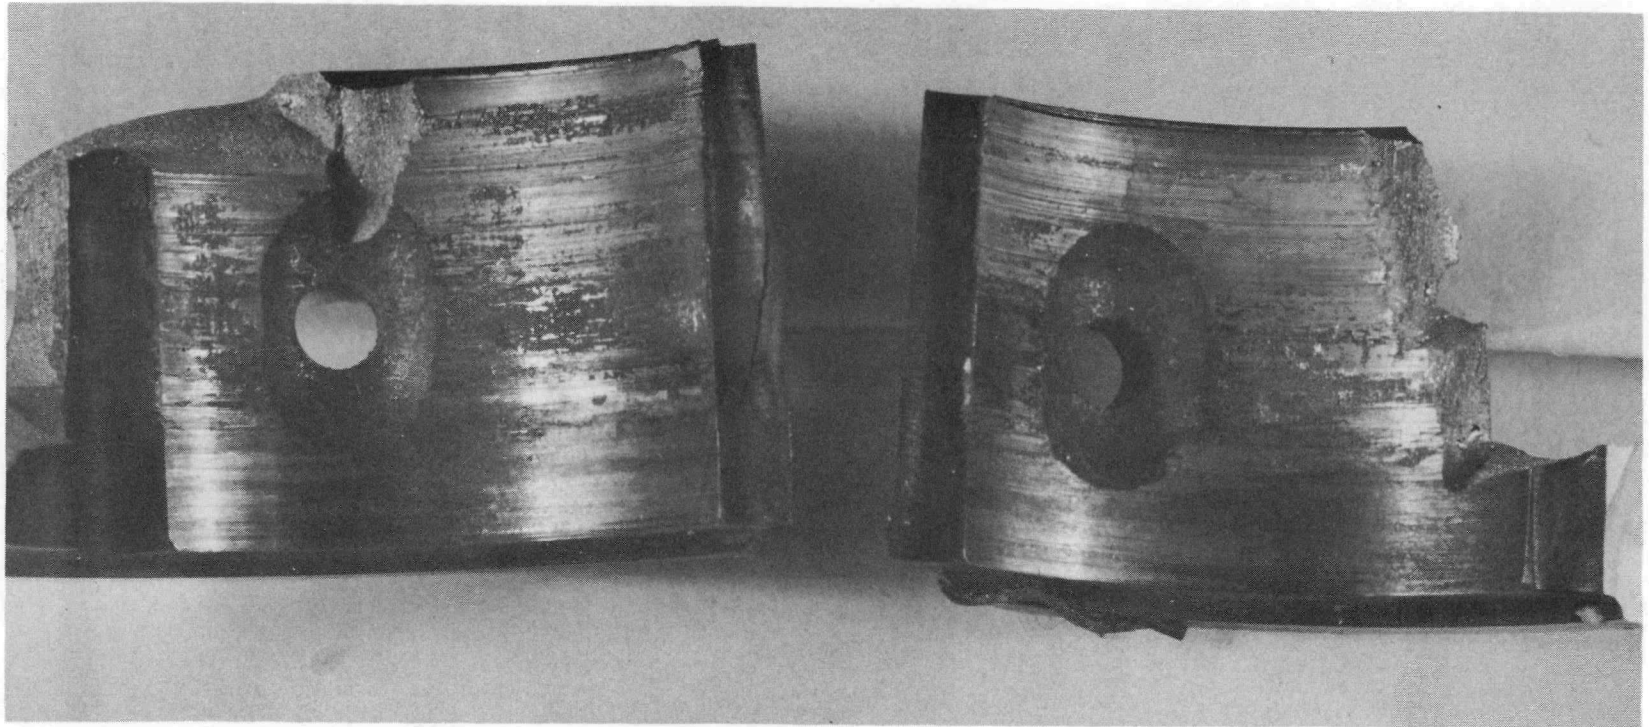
Three-Sector Turbine Bearing Bushing After 875 Hours
